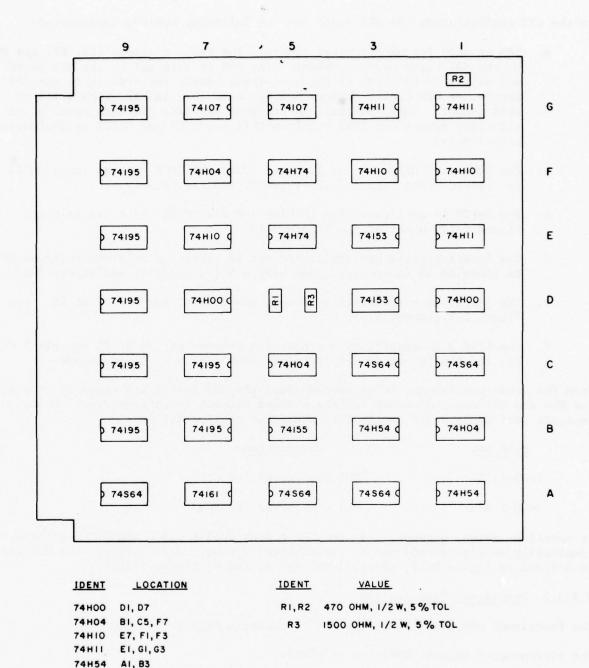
NCU and CIE MD2 Board, Parts Layout Diagram and Parts List
